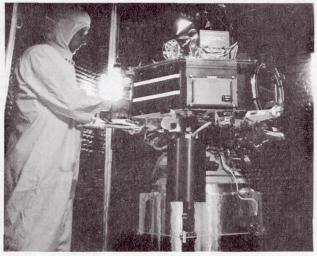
Technician checking paddle arm bracket while under gantry air-cooling hat.
